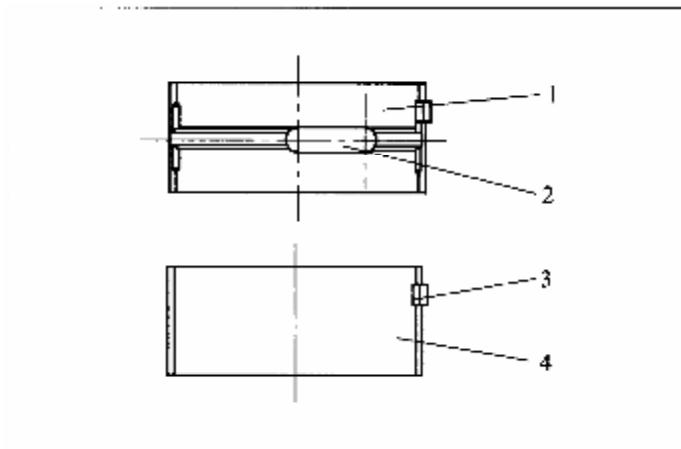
Upper/Lower Main Bearing Shell of Crankshaft
